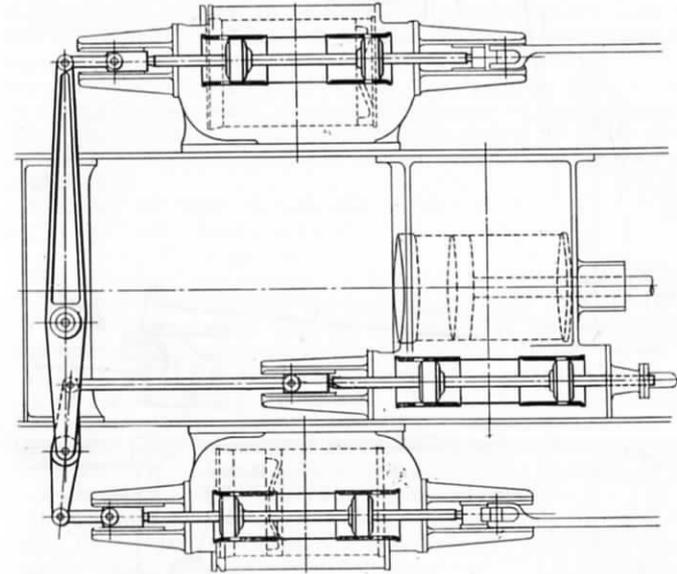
THE GRESLEY VALVE GEAR IN PLAN.
